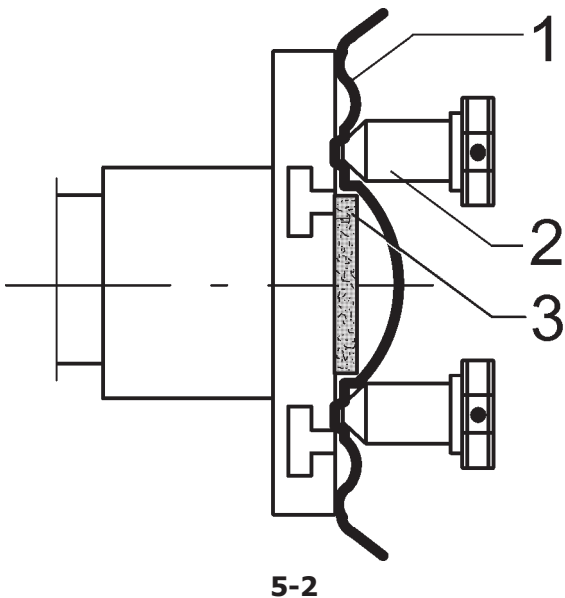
Universal clamping adaptor for clamping stud hole located wheels or wheels with closed rim. This clamping adaptor is also capable of clamping centre bore located wheels when suitable centring rings are used.
